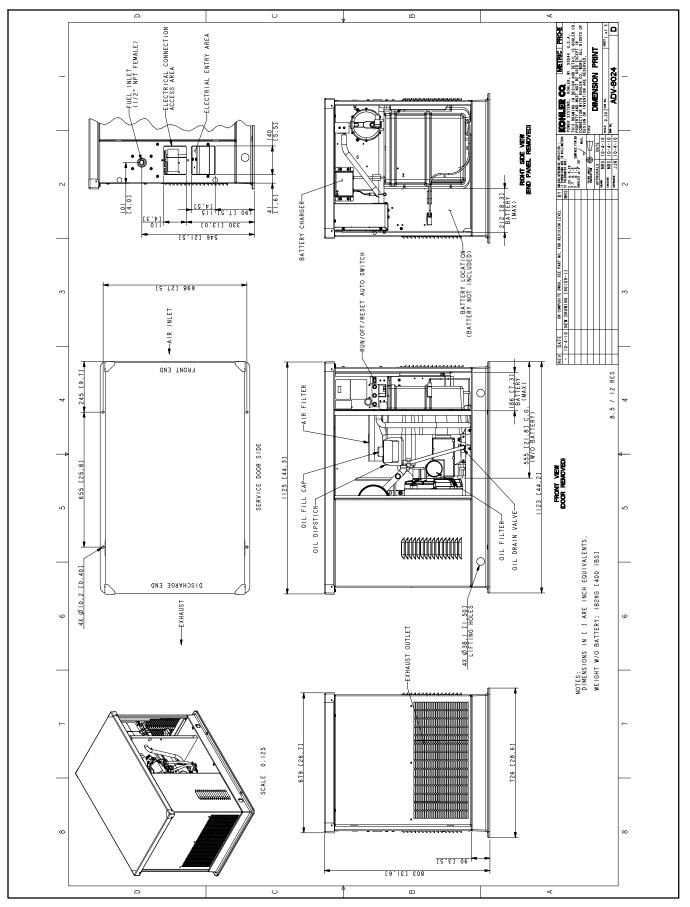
Generator Set Mounting Details and Dimensions, 8.5/12RES, ADV-8024 Sheet 1
